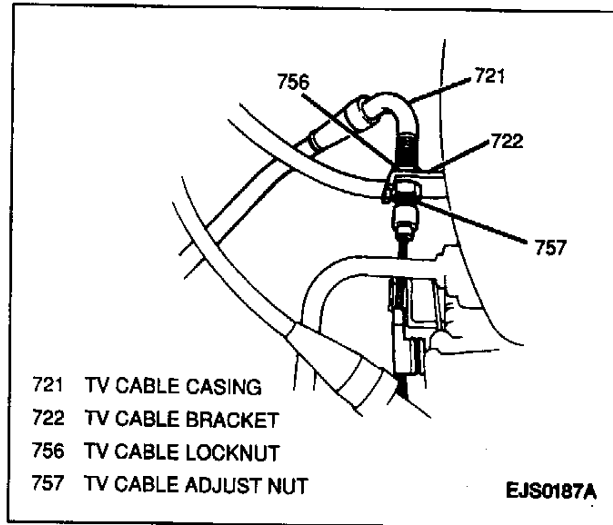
TV Cable at Throttle Body (3L30, 3-Speed)
